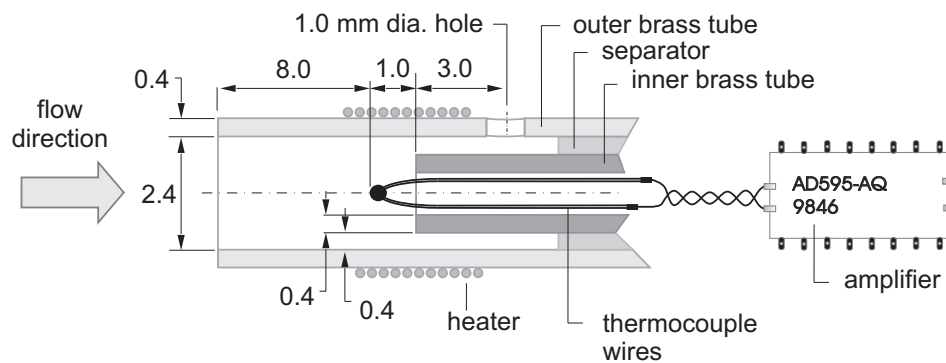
Schematic illustration of the design and the principal dimension of t-type bead-welded thermocouple probe (in mm).
